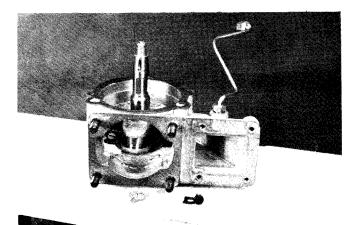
Crankshaft Bearing Installed Showing Retainers and Screws
